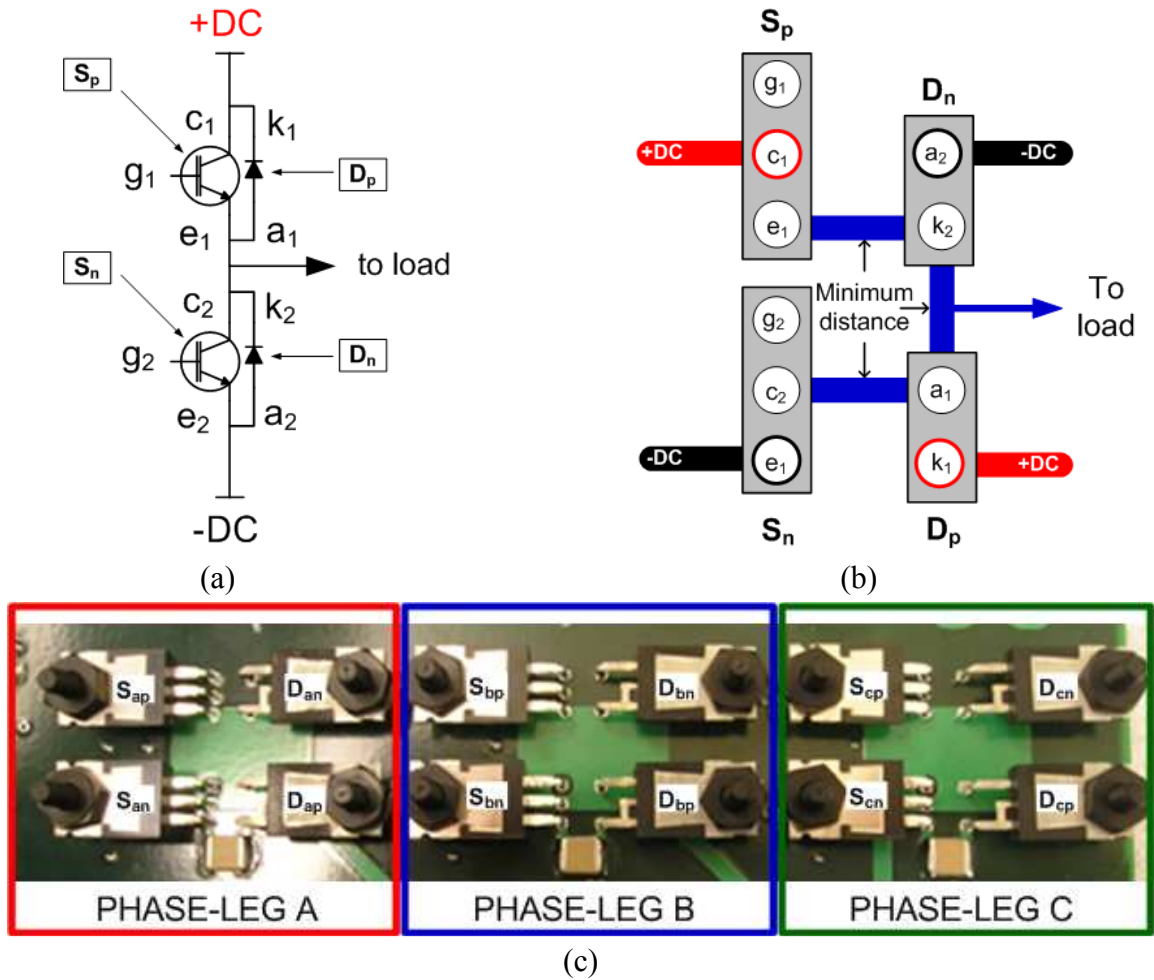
Layout for minimum distance between commutating devices. (a) Phase-leg schematic, (b) physical layout, (c) PCB layout
